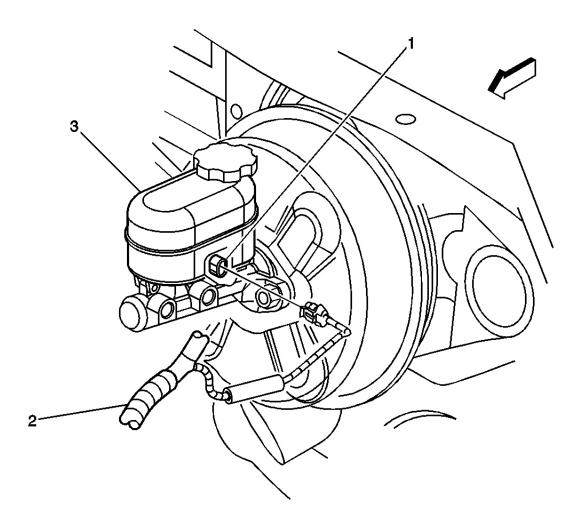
Brake Fluid Level Switch Component View Courtesy of GENERAL MOTORS CORP.
